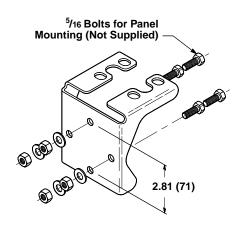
Traditional Flange Mounting Configurations with Optional Brackets for Panel Mounting
